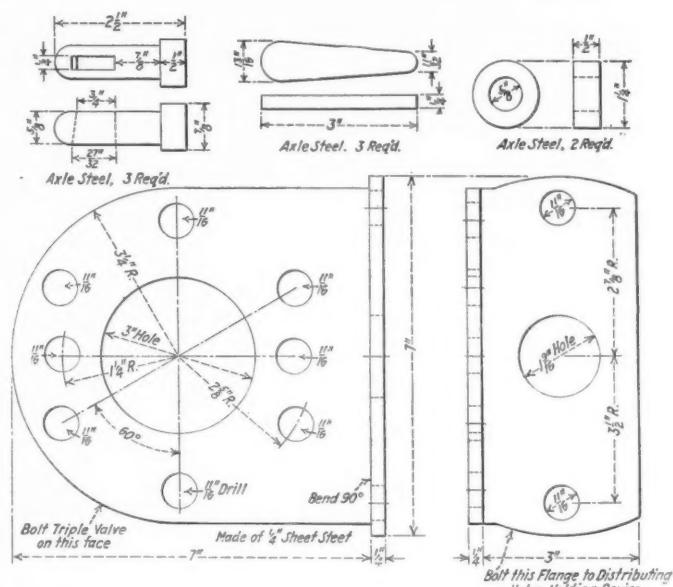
Attachment used on the distributing valve device for holding quick action triple valves when making repairs
